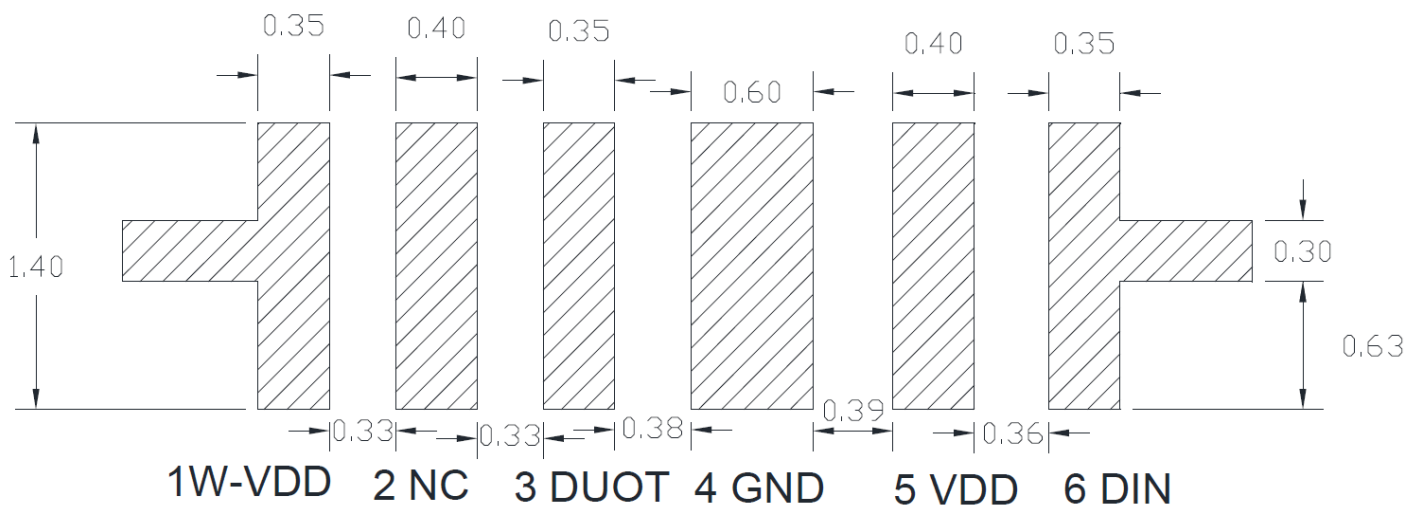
IN-PI4818QAS5R5G5BPW Package Outline Dimensions
